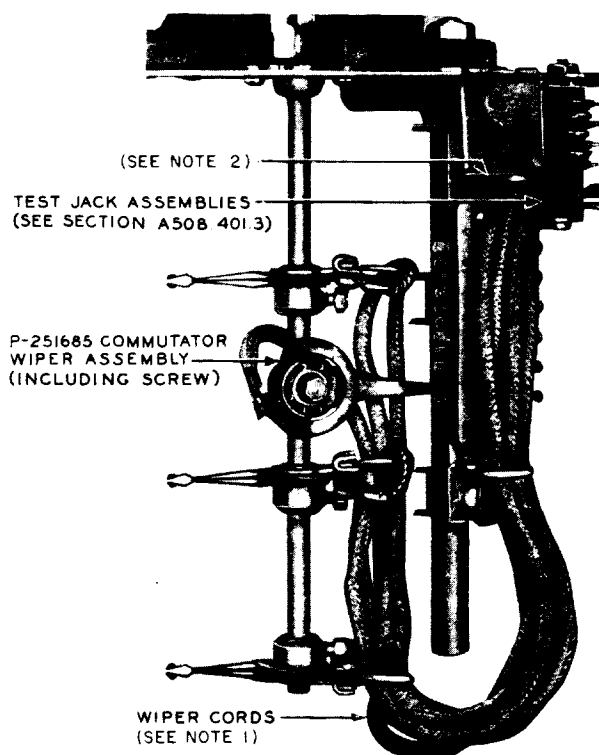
Wiper Assembly With Nondetachable Cord Holder Terminals at Right Angles to Assembly
